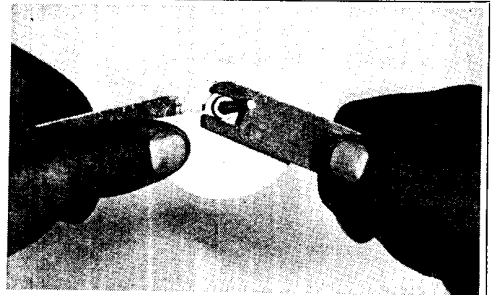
Here the single moving plate of the vernier condenser is being tightened to its spindle
